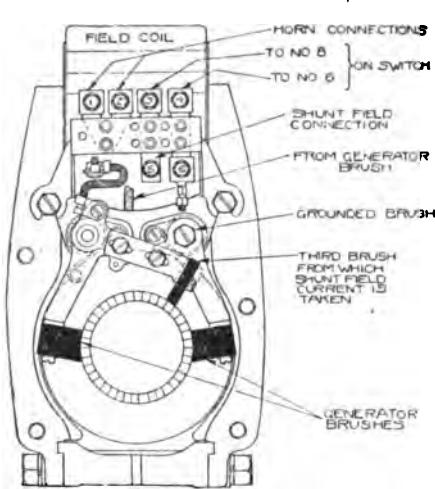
GENERATOR END VIEW CADILLAC-DELCO
